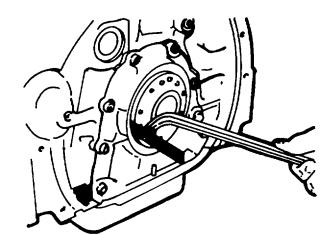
Removing Radial Sealing Ring with Puller 003-0733
